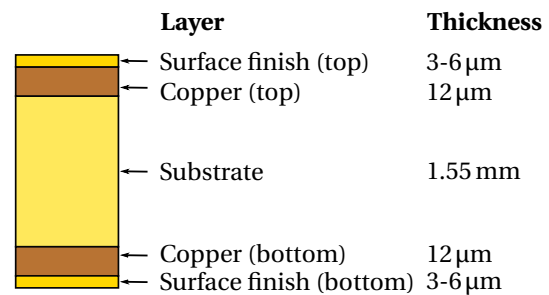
Cross-section of the PCB layout. The PCB consists of several thin layers of material.
